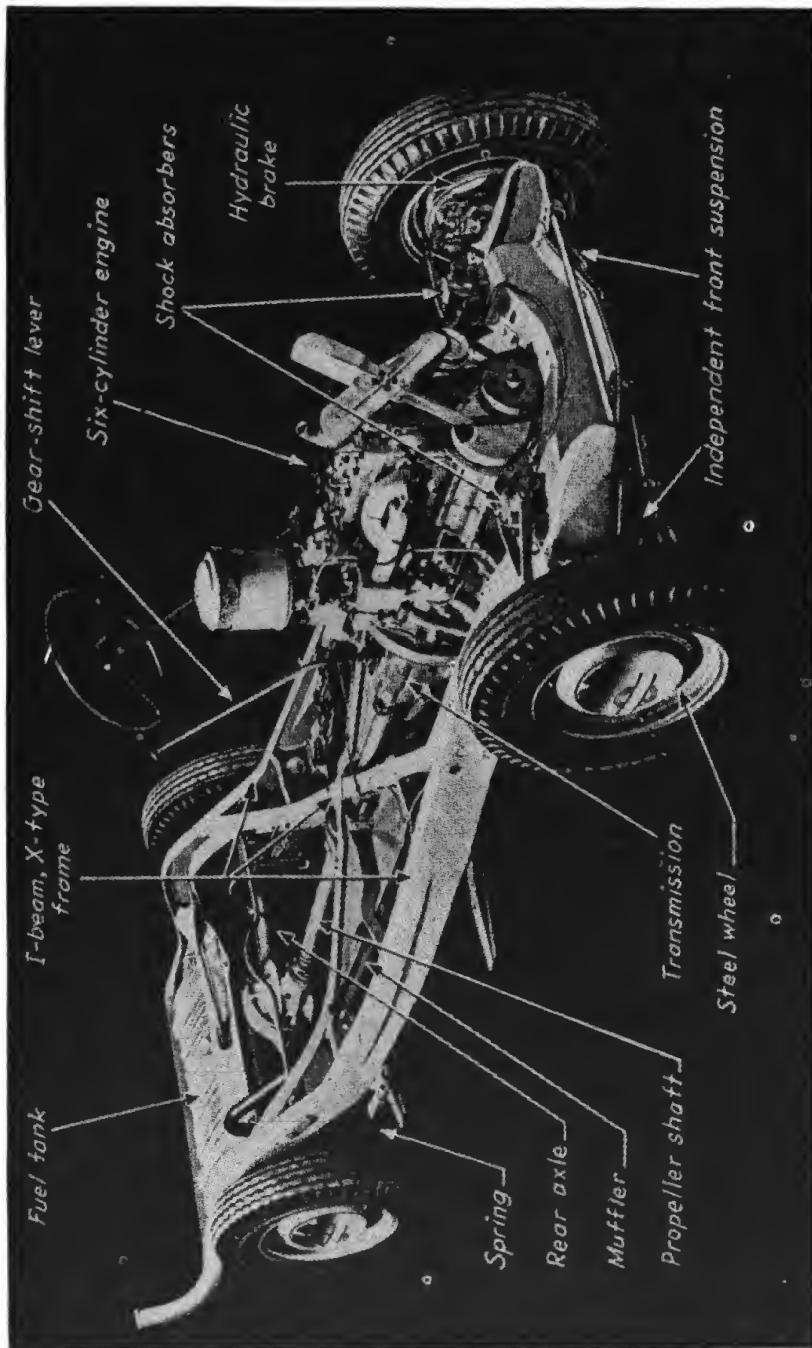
Modern gasoline-engine-driven passenger car chassis showing its various parts.
